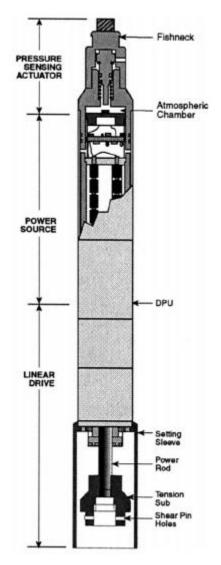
Electronic Setting Device- assembled to DPU[2]
